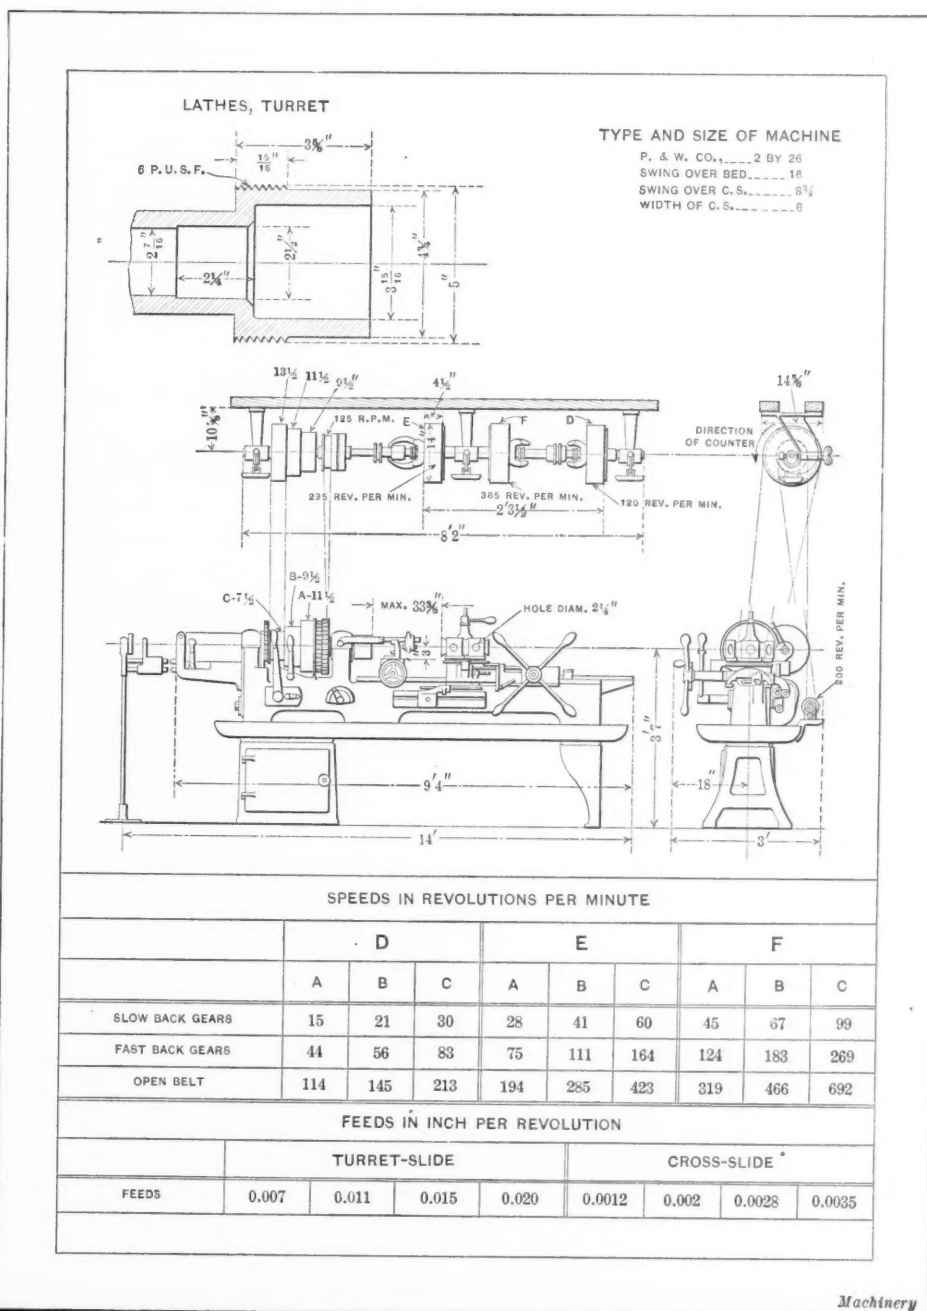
Sheet from Tool Engineer's Loose-leaf File of Machine Tool Equipment, giving Available Speeds and Feeds on Machines and Important Dimensions affecting Design of Tools and Fixtures
